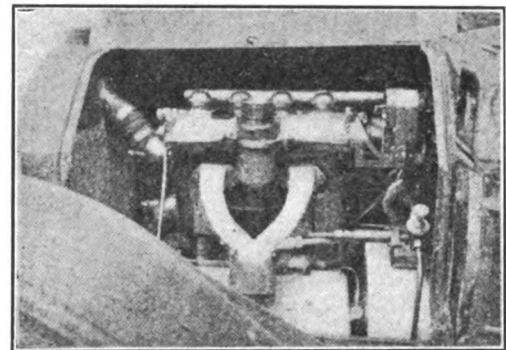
Exhaust side of the C. I. D. rotary sleeve-valve motor.
